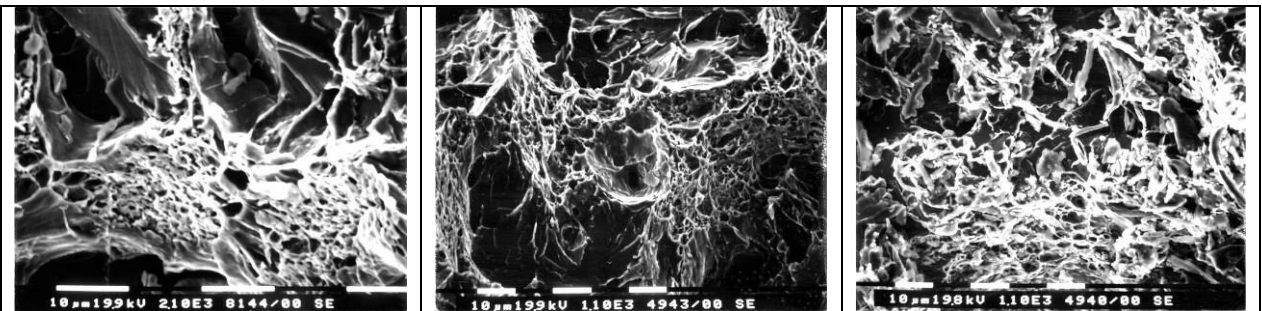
Mixed fracture for HAZ at -27°C for 9.3 mm/s, 12.3 mm/s and 15.3 mm/s welding speeds.
